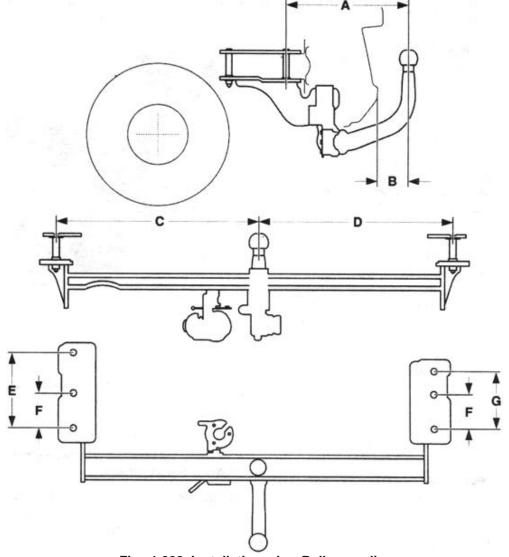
Installation size Pull - coupling device with removable ball support «Limousine"
